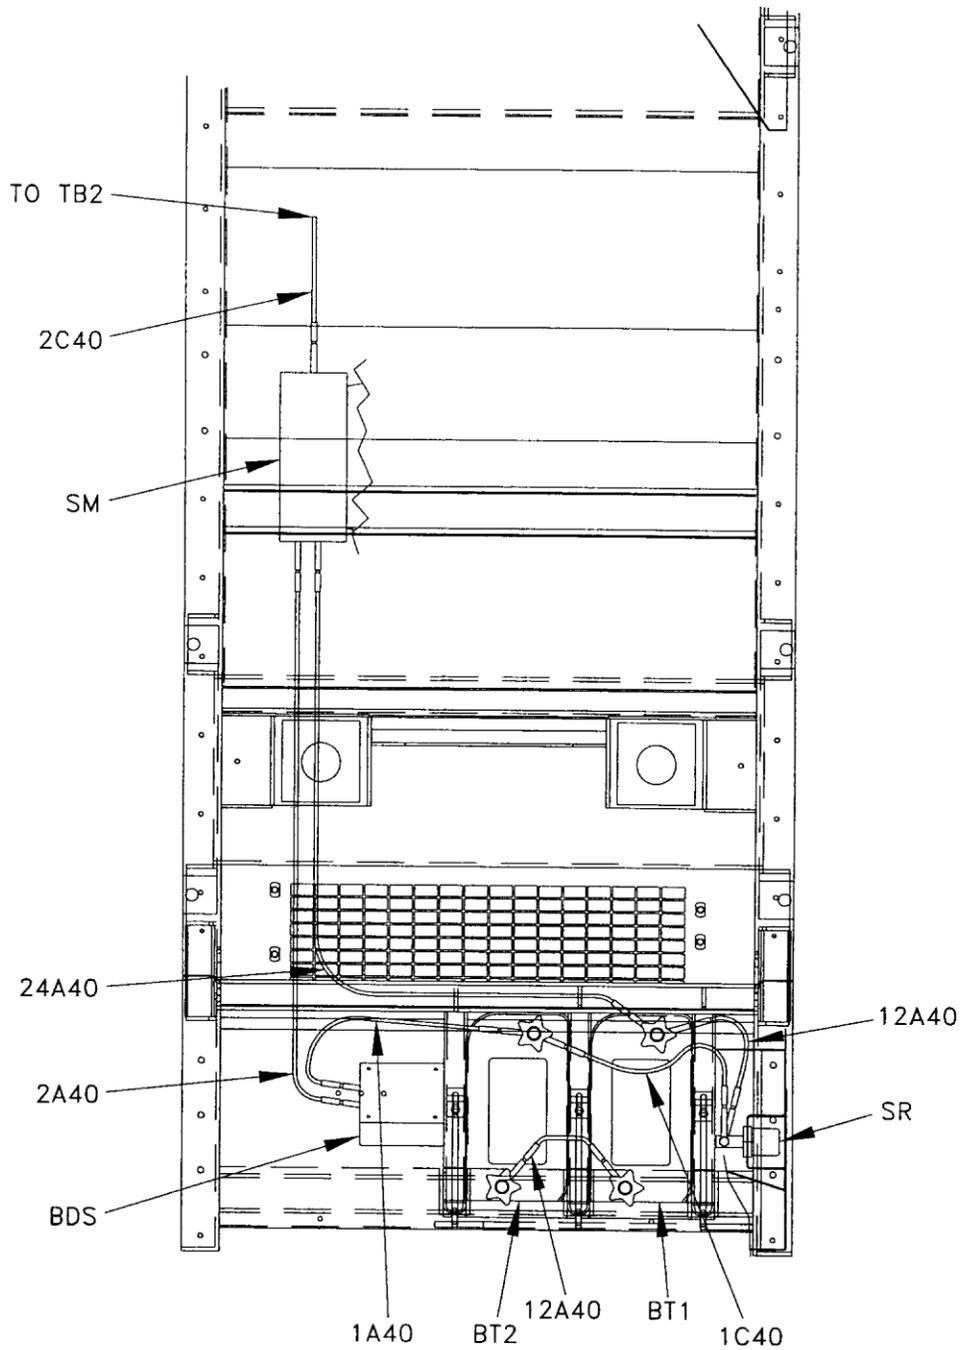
Battery Cable Assemblies (Sheet 2 of 2).
